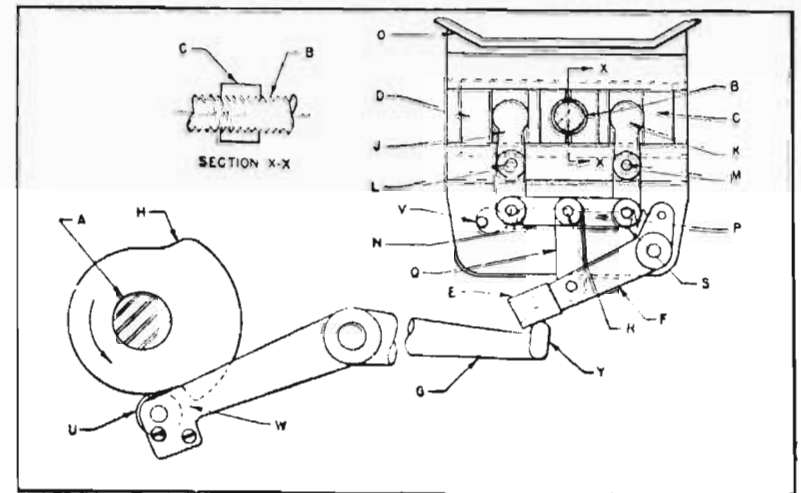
Closed or Feeding Position of Mechanism Shown in Fig. 22. In this View, the Split Nut is in Engagement with the Lead-screw to Feed the Mechanism.
